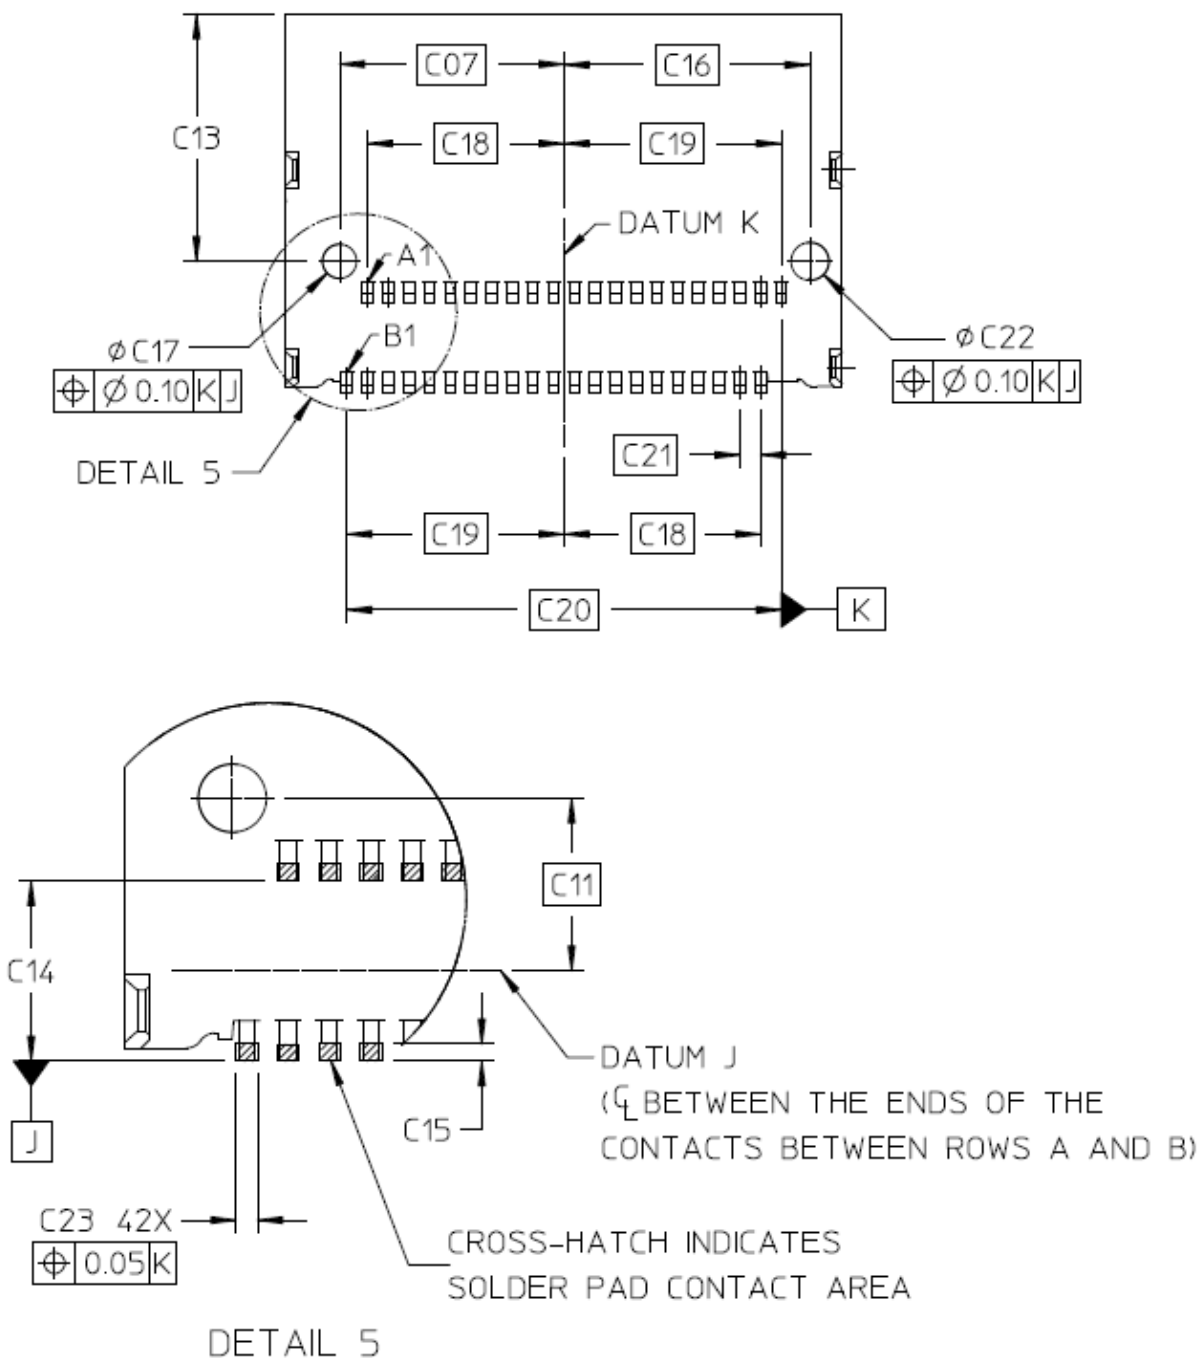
Bottom View of x4 Fixed Host Board-side Right-Angle Form Factor
